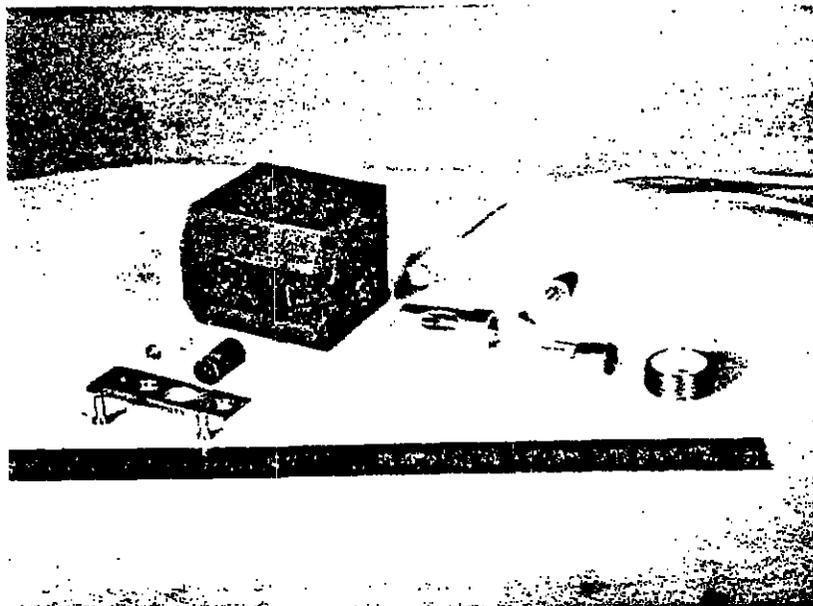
Camera Timing Indicator for Wollensak WF-3 (Exploded View).
